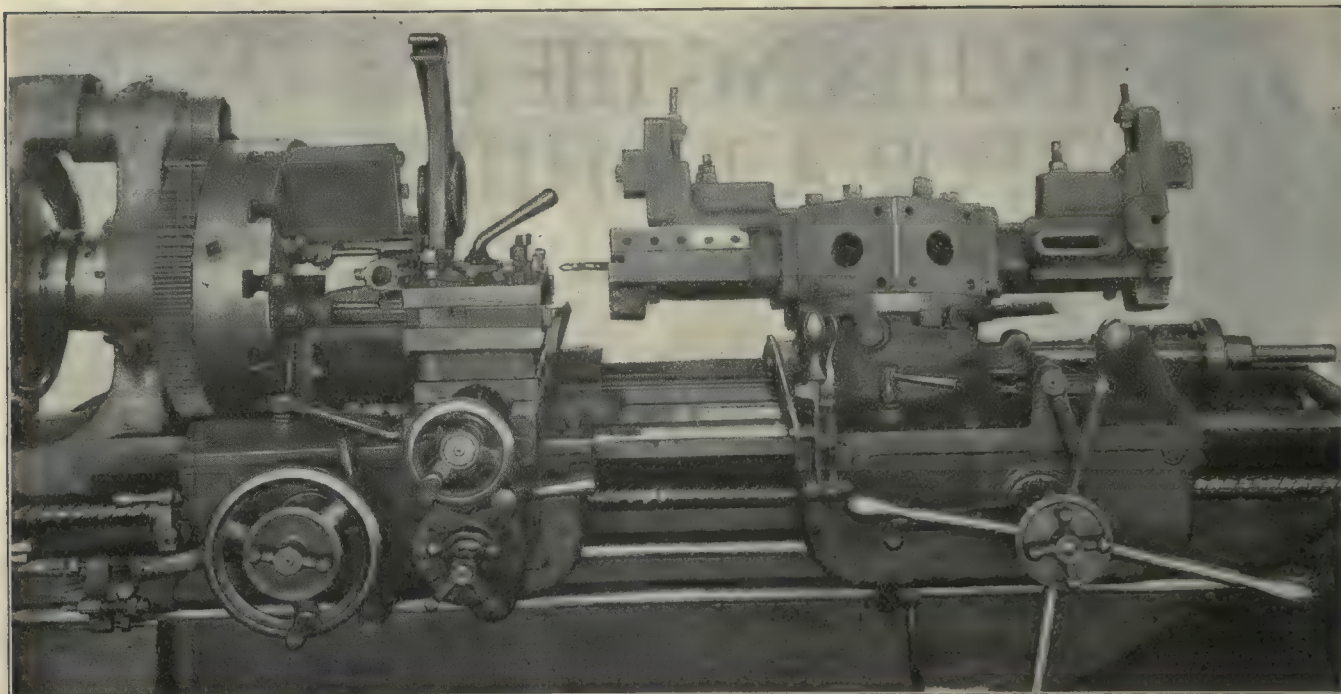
TOOL SET-UP FOR FINISHING CYLINDER HEADS IN TURRET LATHE
